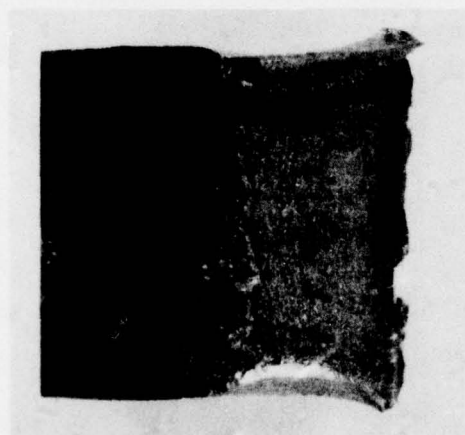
HY-130 Weld-metal Charpy specimen F1-2
